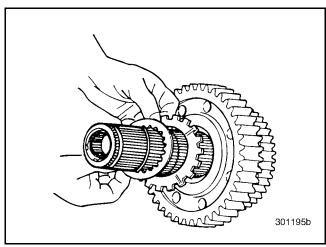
Removing Internal-Toothed and External-Toothed Thrust Washers
